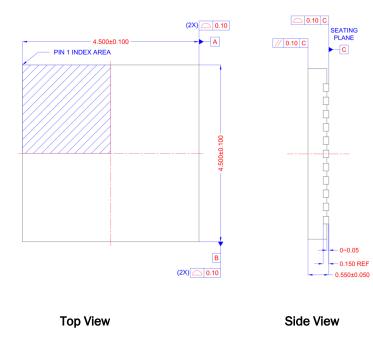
Timp QFN42 Top & Side View Mechanical Drawings
